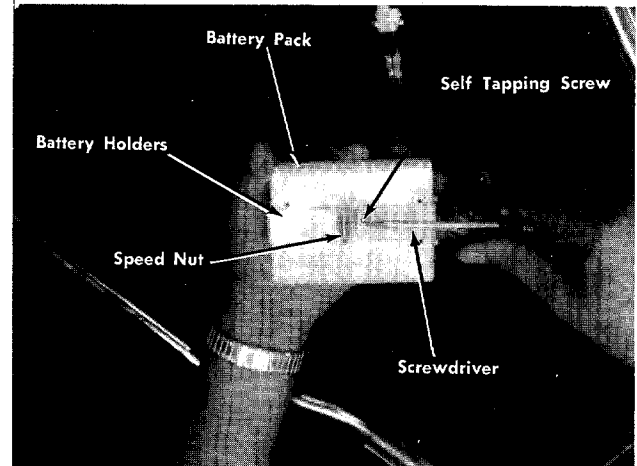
ASSEMBLY OF BATTERY HOLDERS
